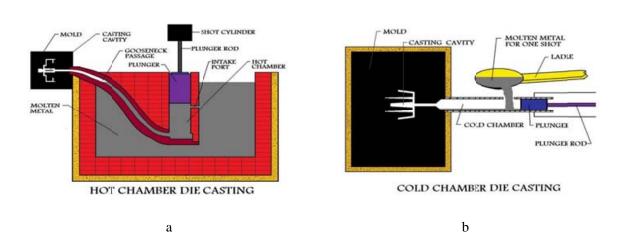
Scheme of the hot-chamber and cold-chamber die casting machine
